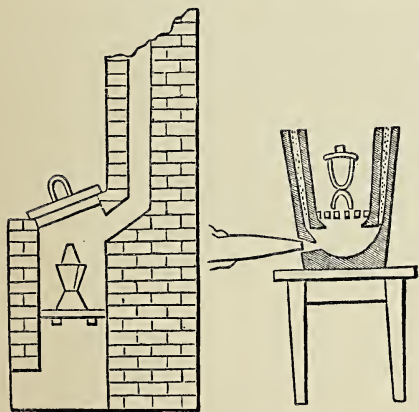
Small Wind and Blast Furnaces for Casting Steel, &c.
